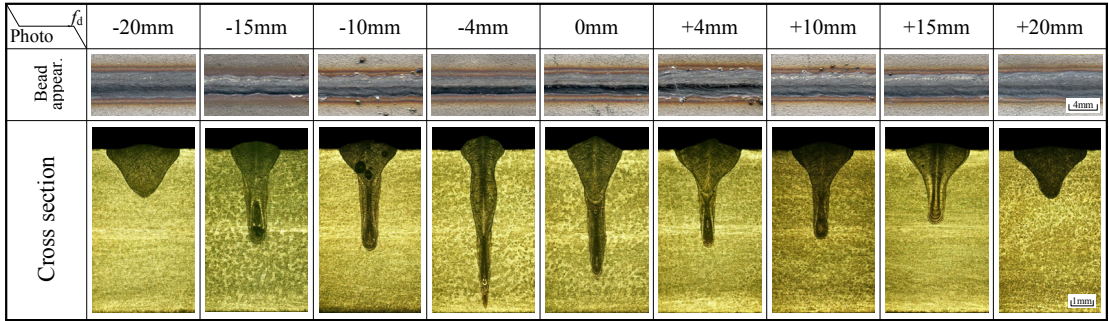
Bead appearance and cross section of weld with various defocused distance in STS316L bead welding by fiber laser
